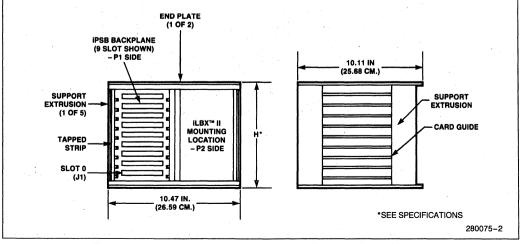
Cardcage Assembly Dimensions (iSBC® PKG/609 shown) 14-2
